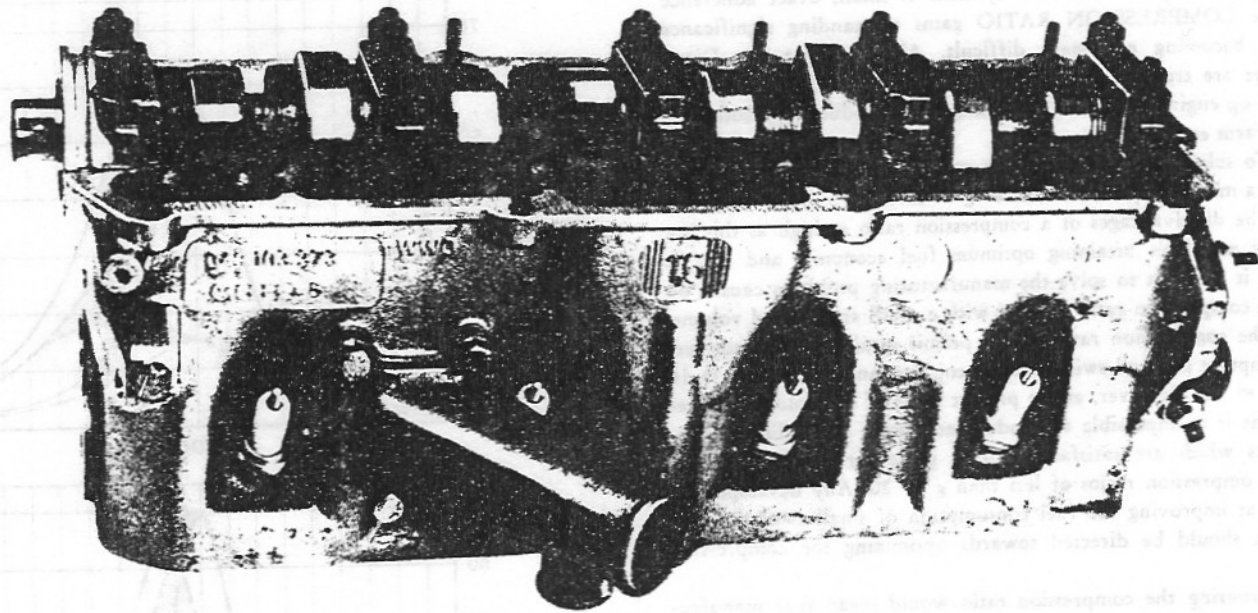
Spark Ignition- and Diesel Engine Cylinder Head
